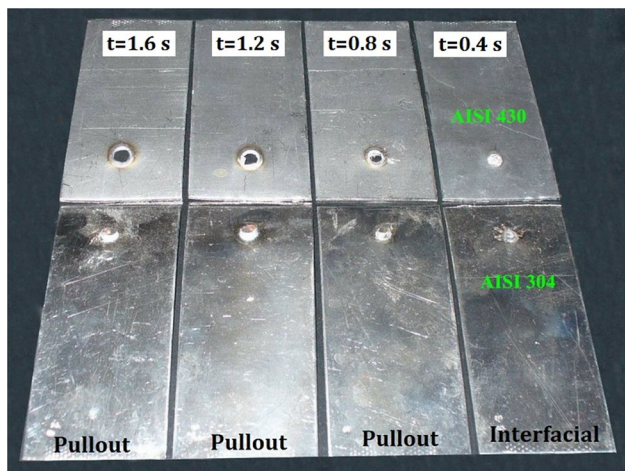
Macrostructural of the fracture surface of spot welded samples for various welding times
